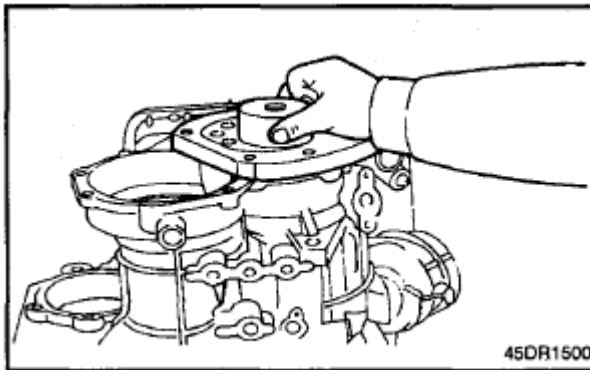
Installing Special Tool Rear Side Of Transaxle Case
